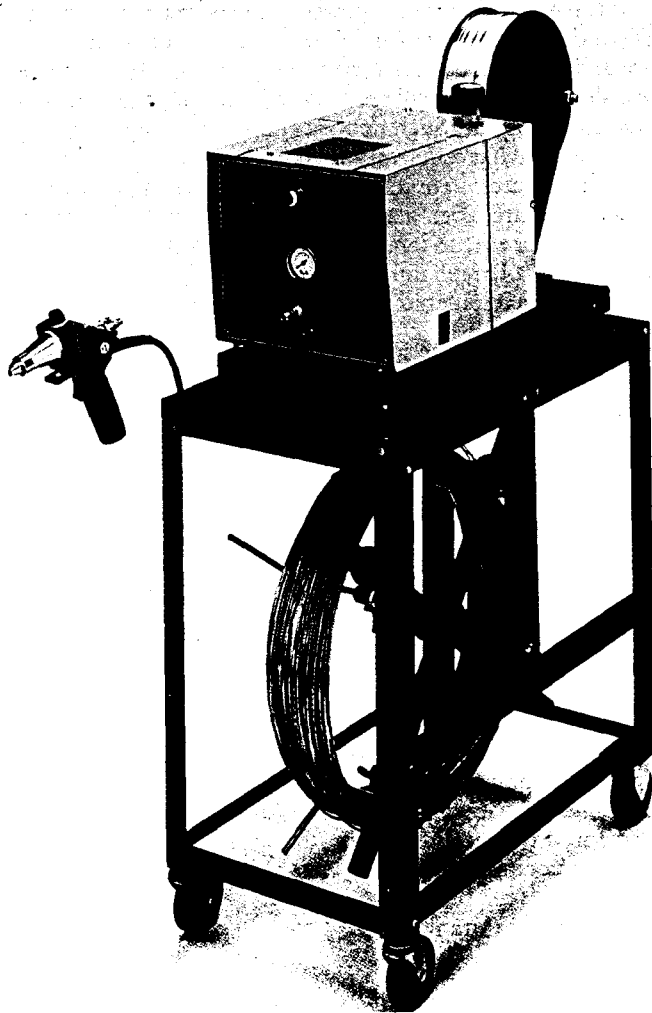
Oxyfuel Gas Wire Spray Equipment Capable of Spraying Wires Ranging from Low Melting Alloys (Babbitt) to Higher Melting Point Steels. Aluminum Wire Shown on Top Spool and Carbon Steel Wire on the Bottom Reel.
